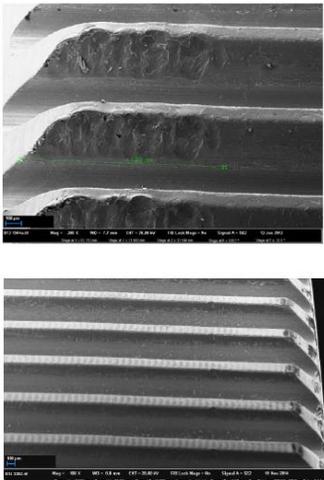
Upper SEM image of toothing after failure of endurance test in vacuum and lower SEM image of toothing after successful vacuum testing
